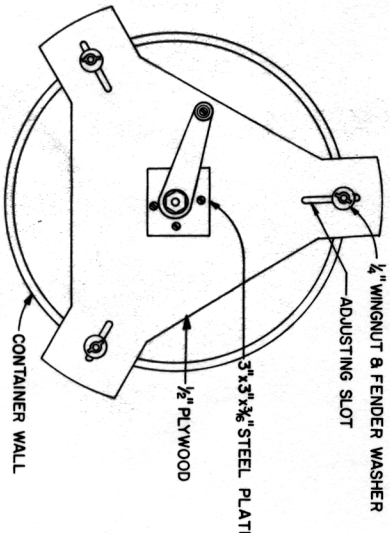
EXTRACTOR PARTIAL SECTION
